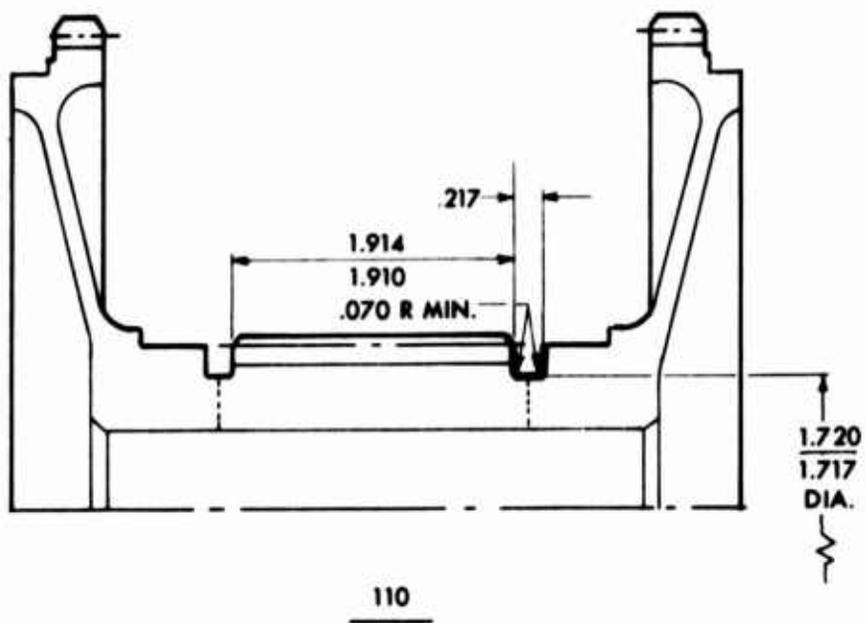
RG351-11182-063, Machine Operation Drawing.
